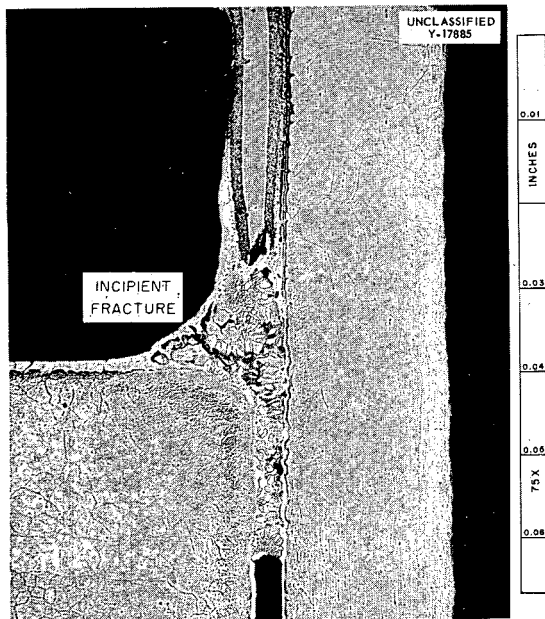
Longitudinal View of Tube C-3 from PWA Radiator No. 2 as Viewed Against the Air Flow. Note fracture within the eutectic structure of braze metal. 75X. Reduced 41%.
